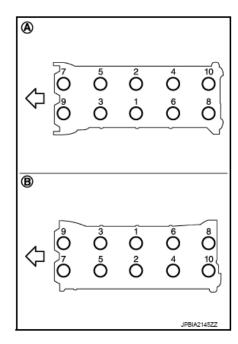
Cylinder Head Bolt Tightening Sequence Courtesy of NISSAN NORTH AMERICA, INC.
